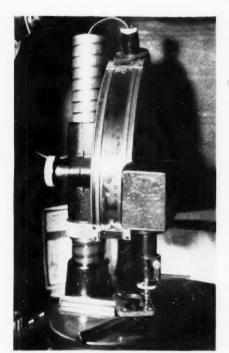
Using a Pratt & Whitney plug type air gage to check diameter of ground side plate holes.
